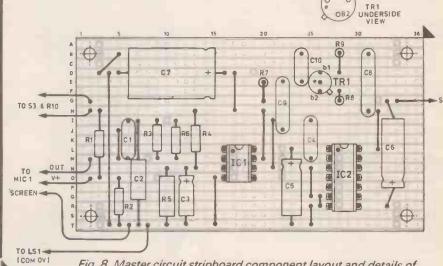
Master circuit stripboard component layout and details of breaks required in the underside copper tracks.
